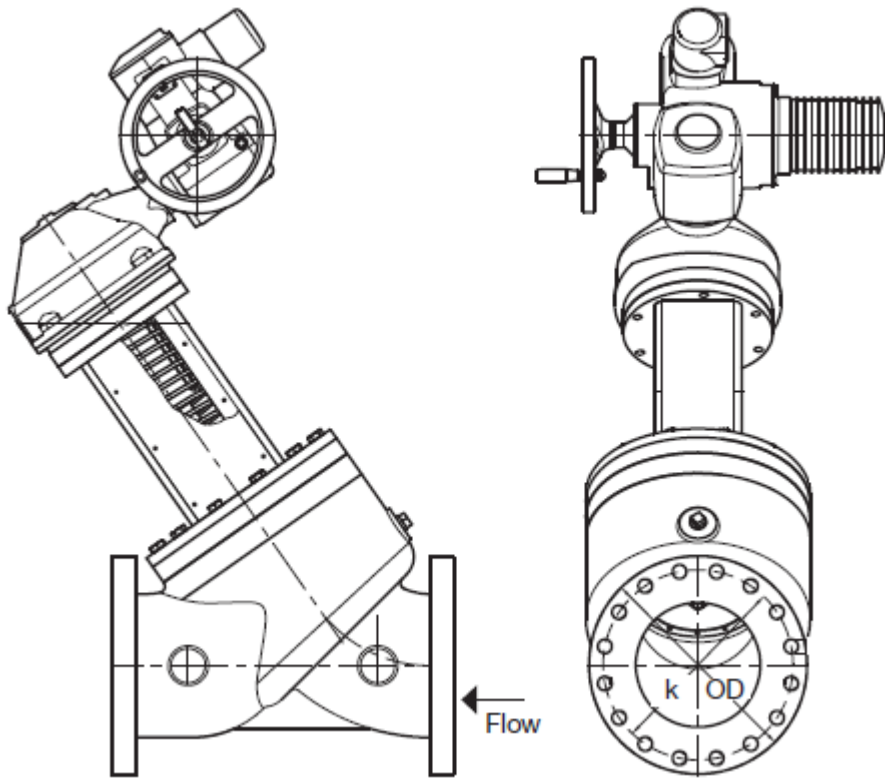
VAG CHECKtronic pump safety valve with gearbox and electric actuator
